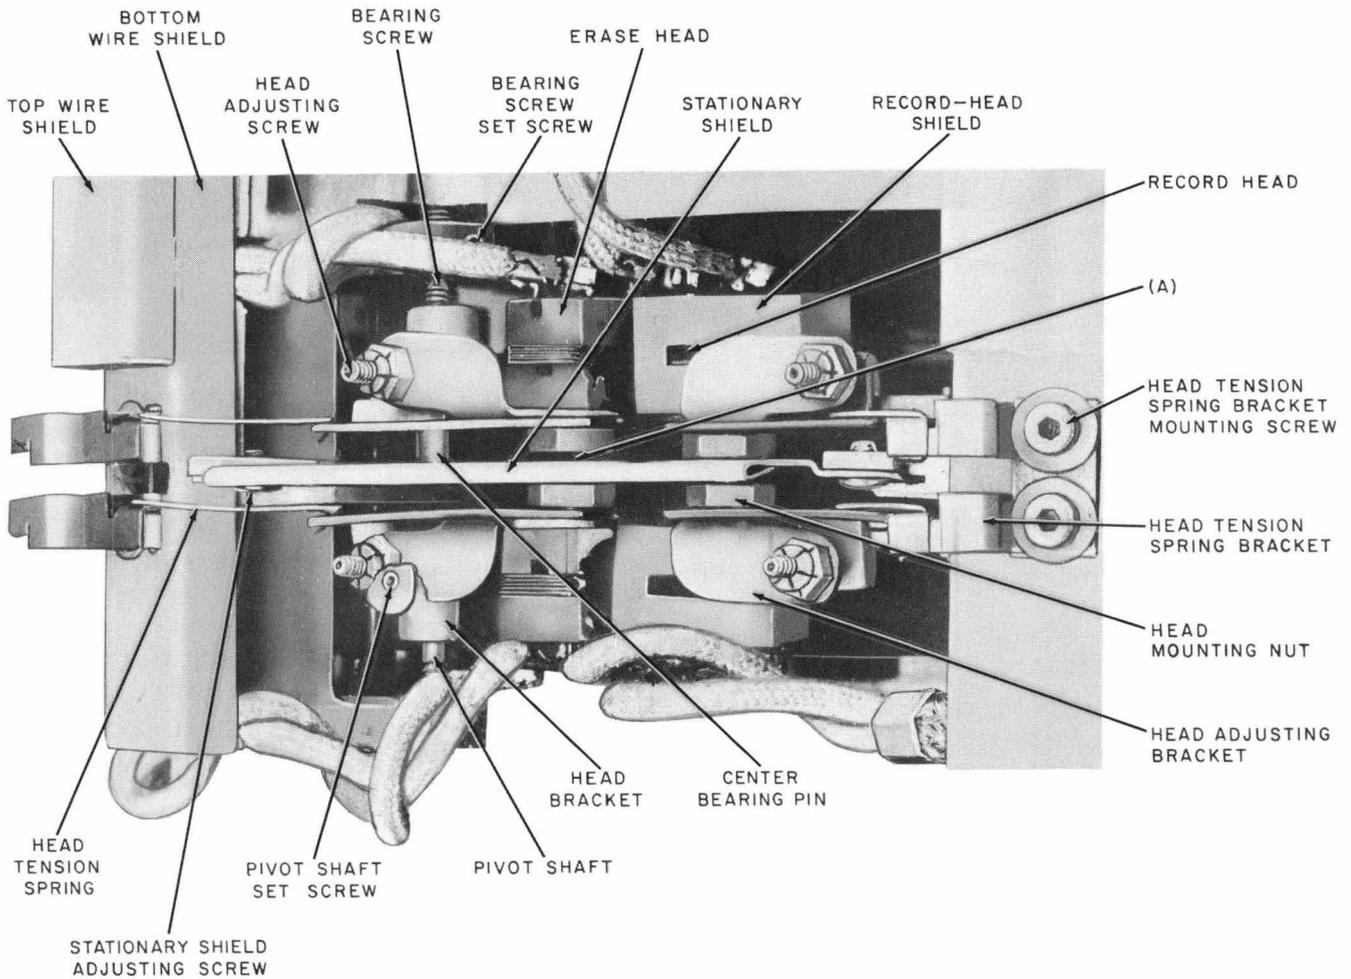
KS-12068 L4, L5, and L6 Recorder-Reproducers — Erase and Record Head Assembly and Associated Parts
